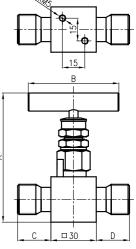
ANGLE VALVE 967 21 .., dimensional drawing, scheme, application
